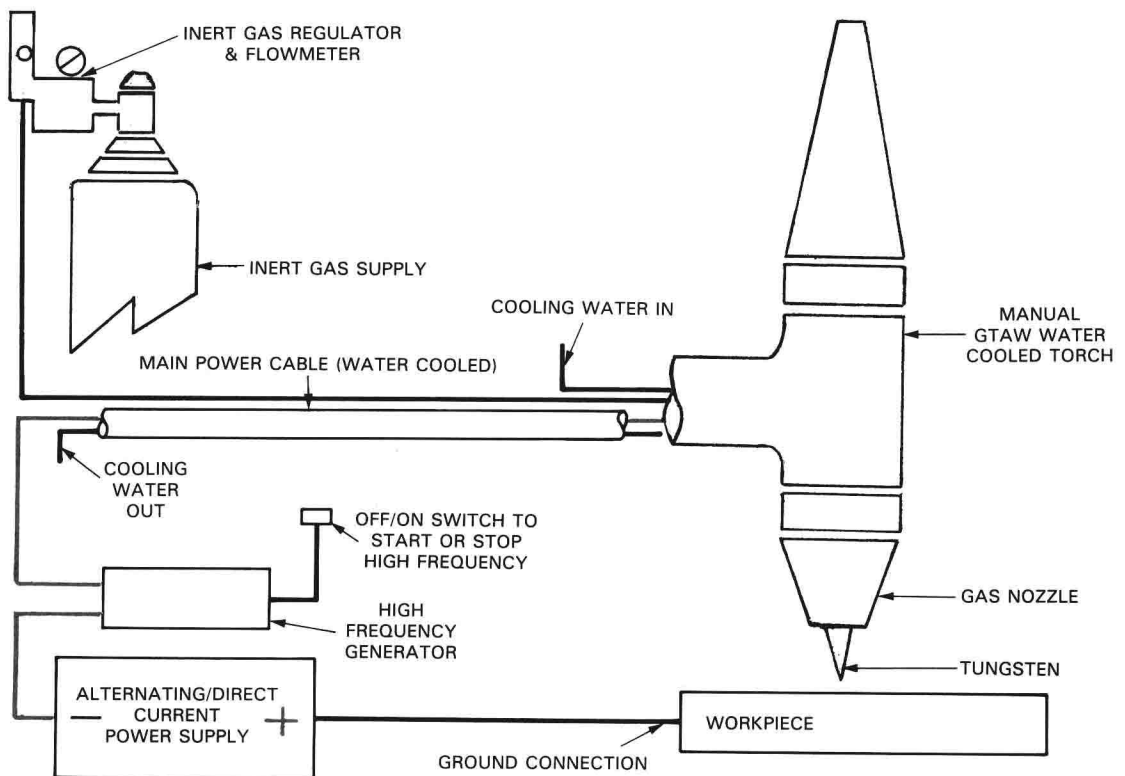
Higher welding currents can be used in this GTAW system because the torch is water cooled.
